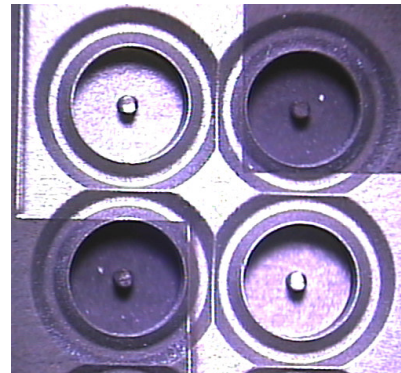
Rubber mould tool showing square areas that have had residue removed by laser cleaning
